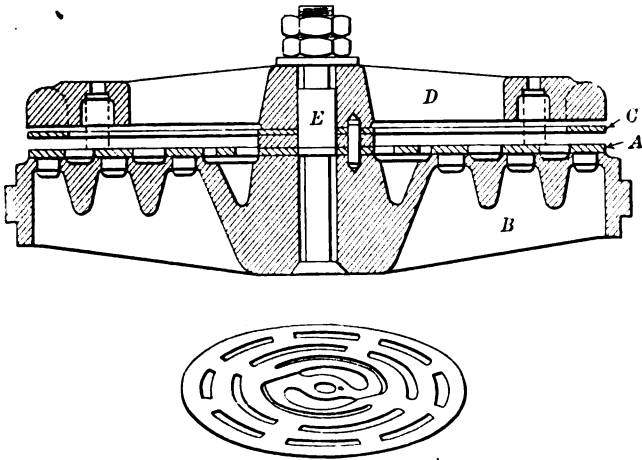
MULTI-PORTED PLATE VALVE (HOERBIGER-ROGLER)
